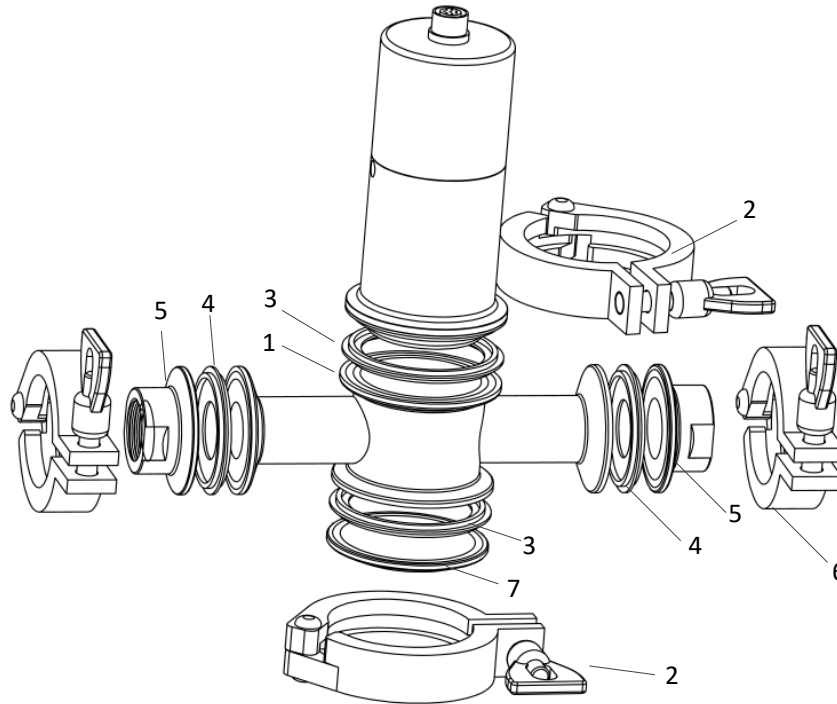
Tri-Clamp Flow Cell Assembly (P/N: 56206)
